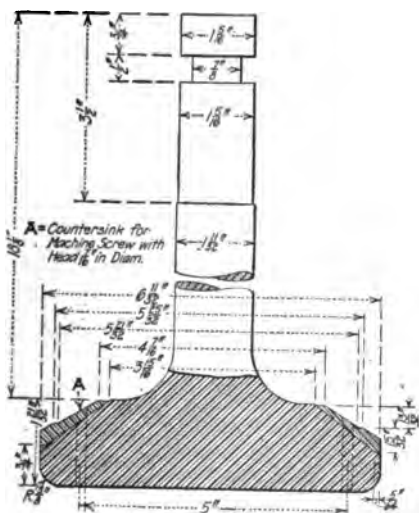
McIntosh & Seymour Diesel exhaust valve.
